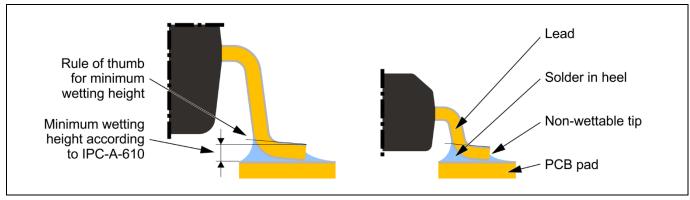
Schematic depictions of the backward PCB pad extension for optimal solder fillet formation in heel according to a rule of thumb and to the IPC-A-610 [6].
